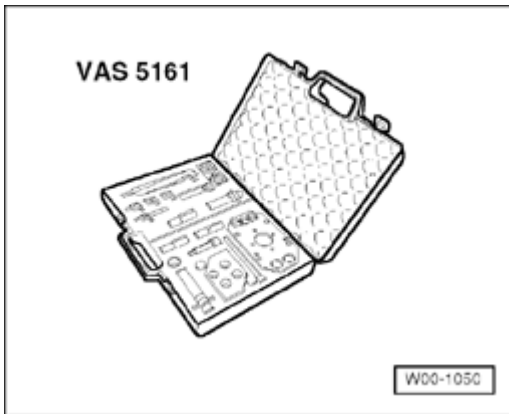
Valve Cotter Disassembly/Assembly Device VAS 5161
